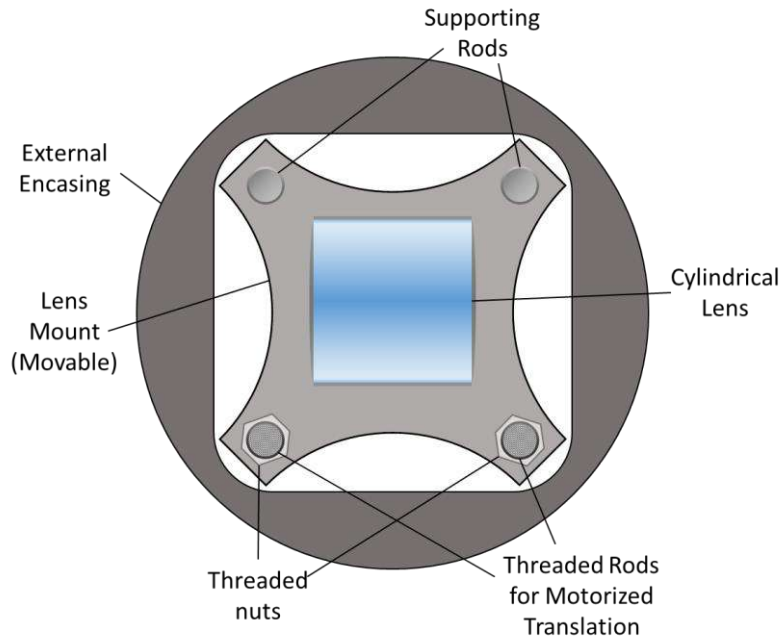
Movable Lens Mount For FOV-Adjusting Cylindrical Lens
